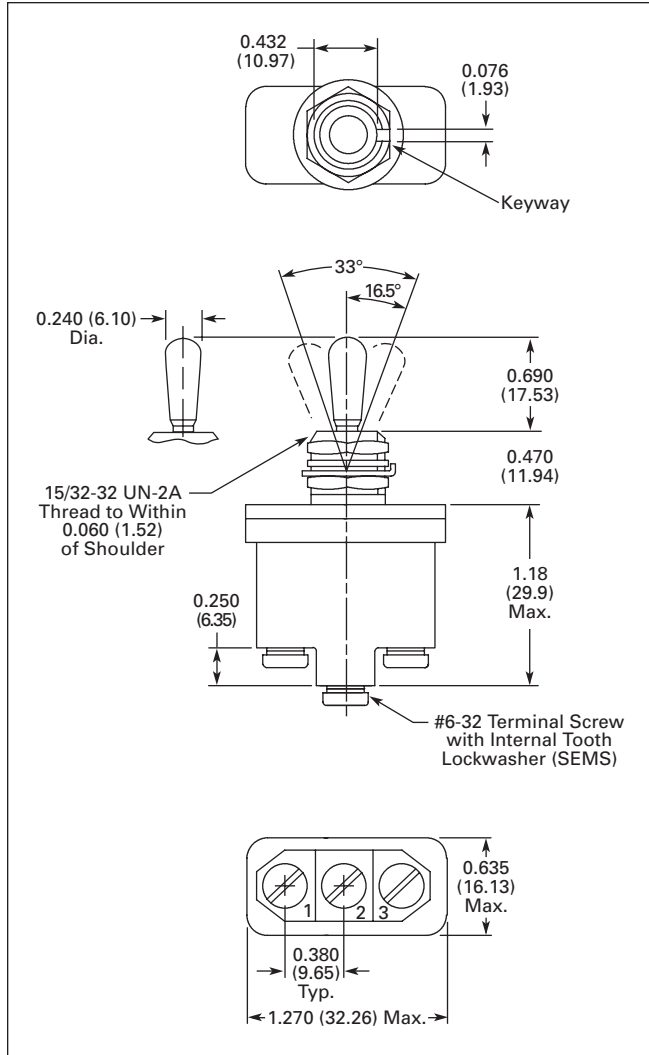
One-Pole Molded-In Screw Terminal E10E Series Toggle Switches — Approximate Dimensions in Inches (mm)
